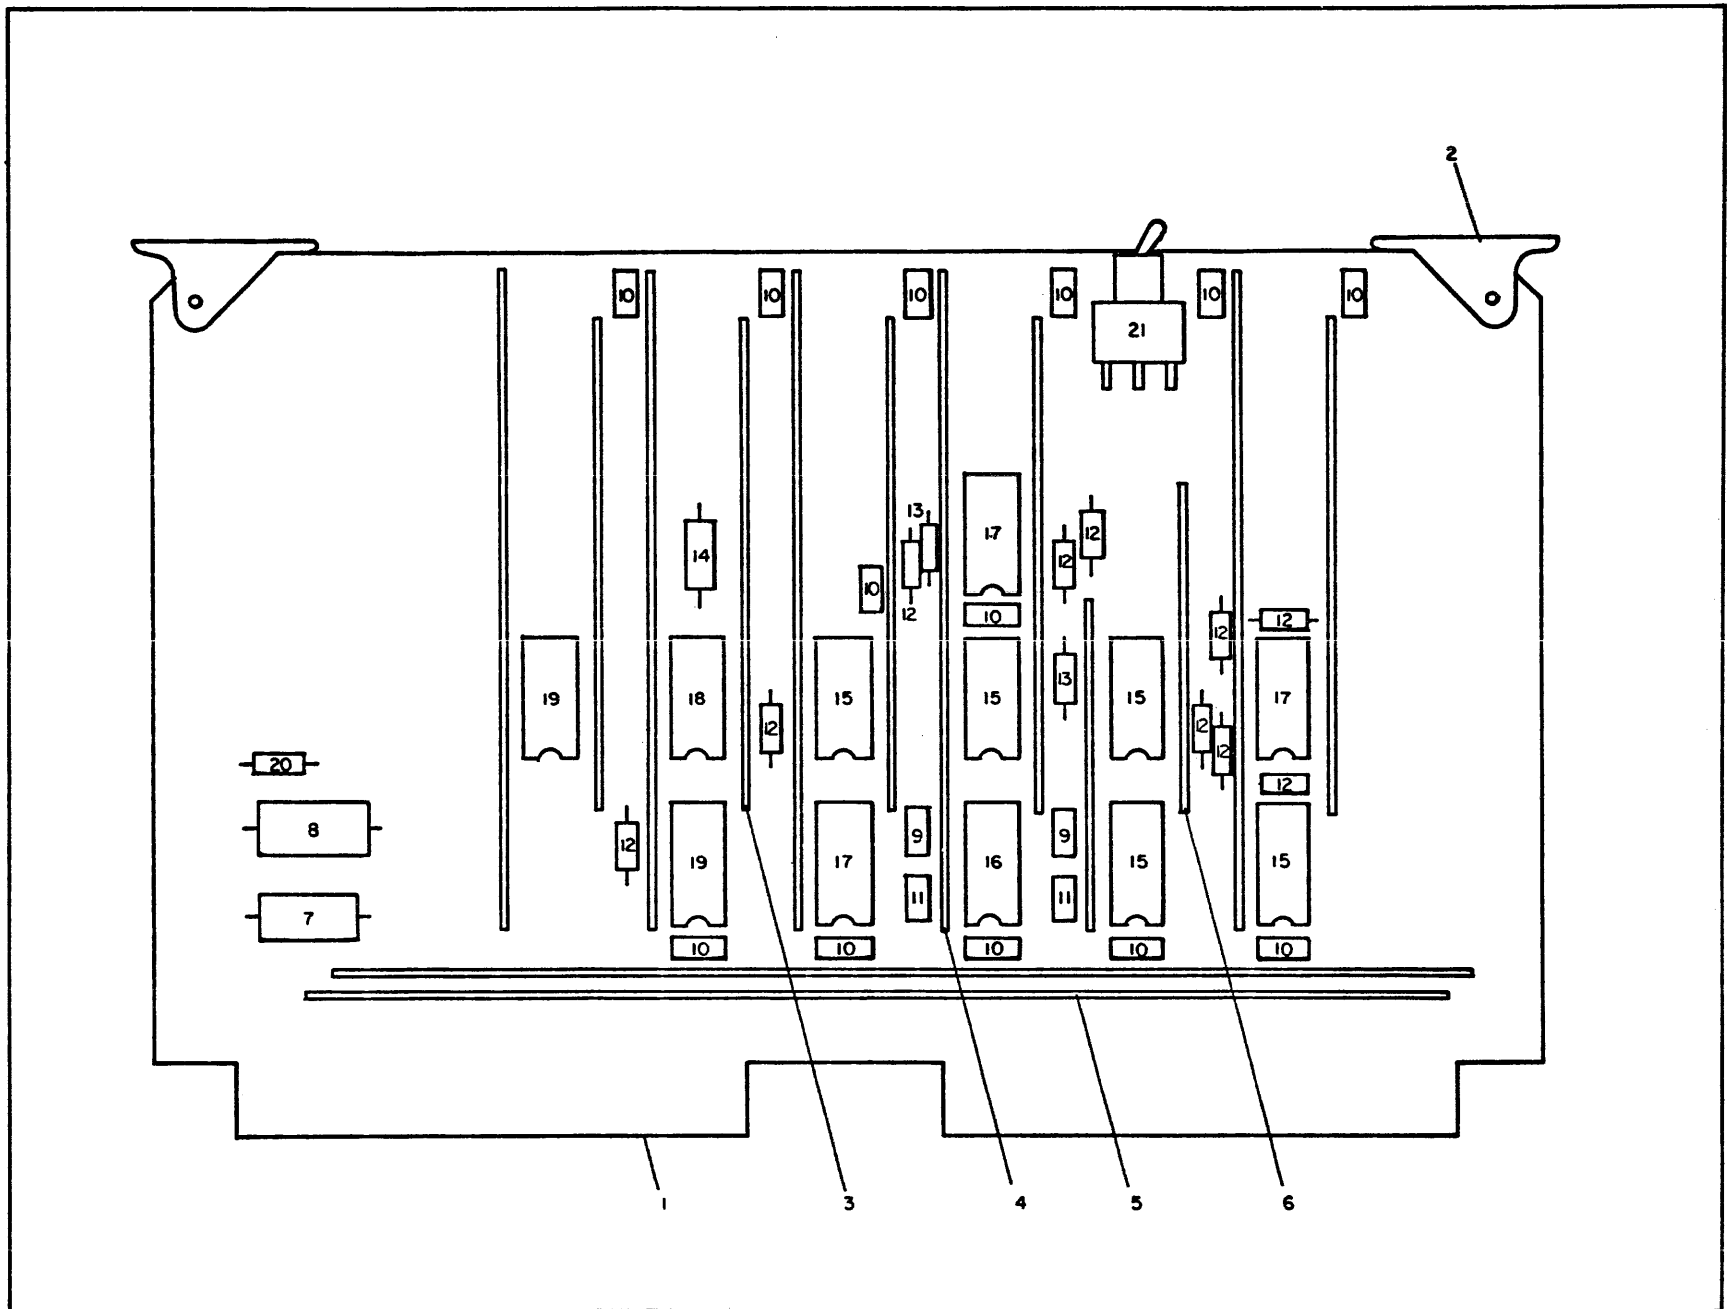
PC ASSEMBLY - RECEIVER CARD
